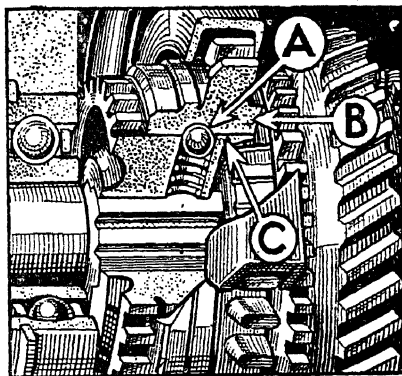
The Use of Spring-loaded Balls in Synchromesh Gears.
